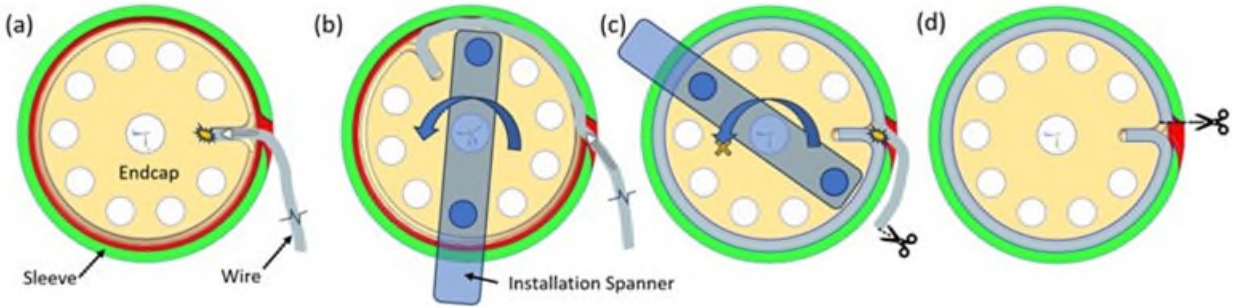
Section views of wire-wound endcap joint at various stages of assembly. (a) Initial installation of wire through sleeve installation slot into endcap retaining hole. (b) Endcap is rotated counterclockwise, drawing wire into channel. (c) Wire is drawn completely around circumferential channel and self-interferes. External wire pigtail remains for endcap removal. (d) Wire is cut and pulled into joint for irreversible configuration.
